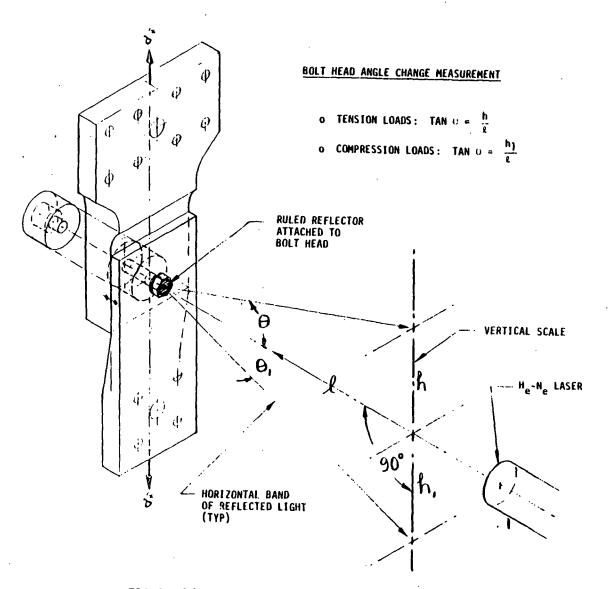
BOLT HEAD ANGLE CHANGE MEASUREMENT
